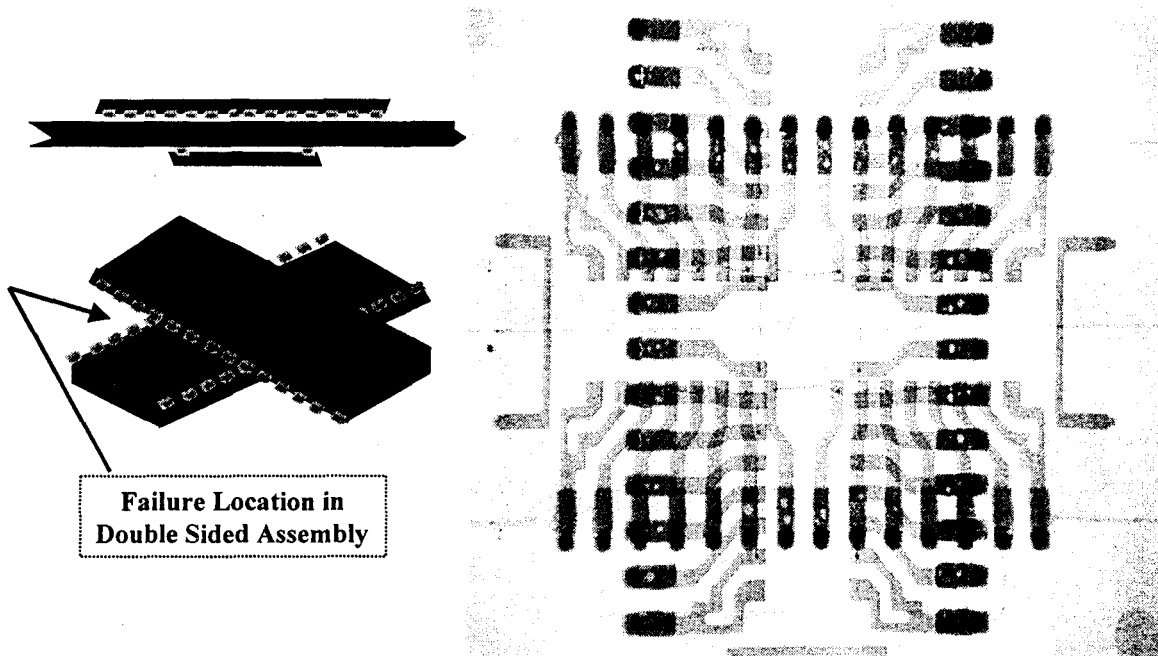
Solder Joint Failure Location in Double Sided Mirror-imaged Assemblies
